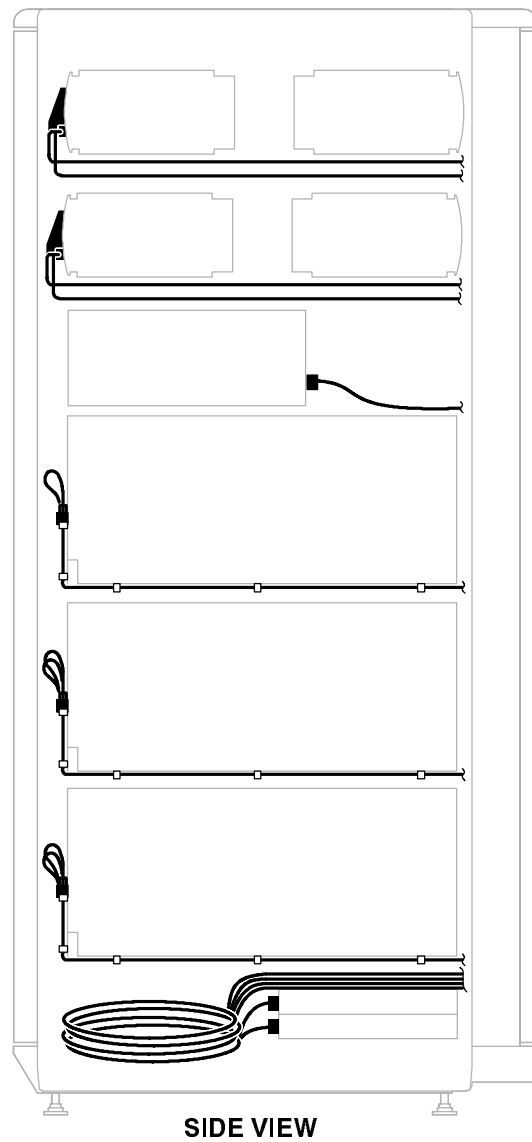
AS4000/4100 Mounting and Cabling (Sheet 11 of 23)
